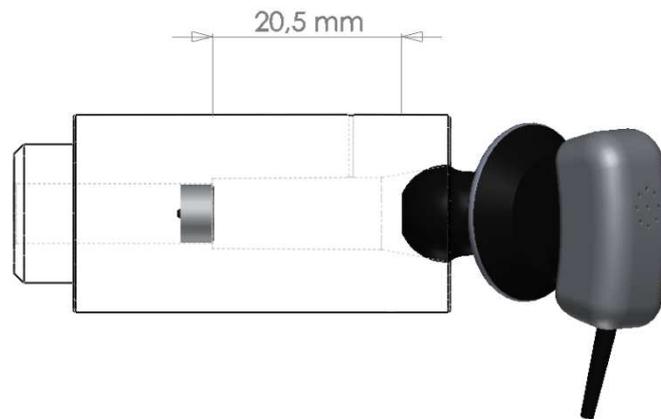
Design drawing, acoustic coupler prototype 1
